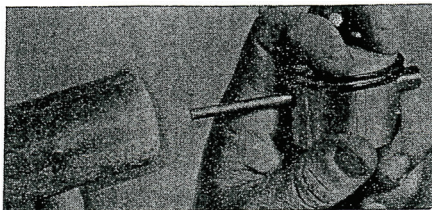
After removing snap rings, the piston pin can be tapped out using a 3/16-inch rod as shown or, on pistons with Spirol pin at exhaust side, by driving piston pin out with slotted driver (Homelite tool No. 23949).
